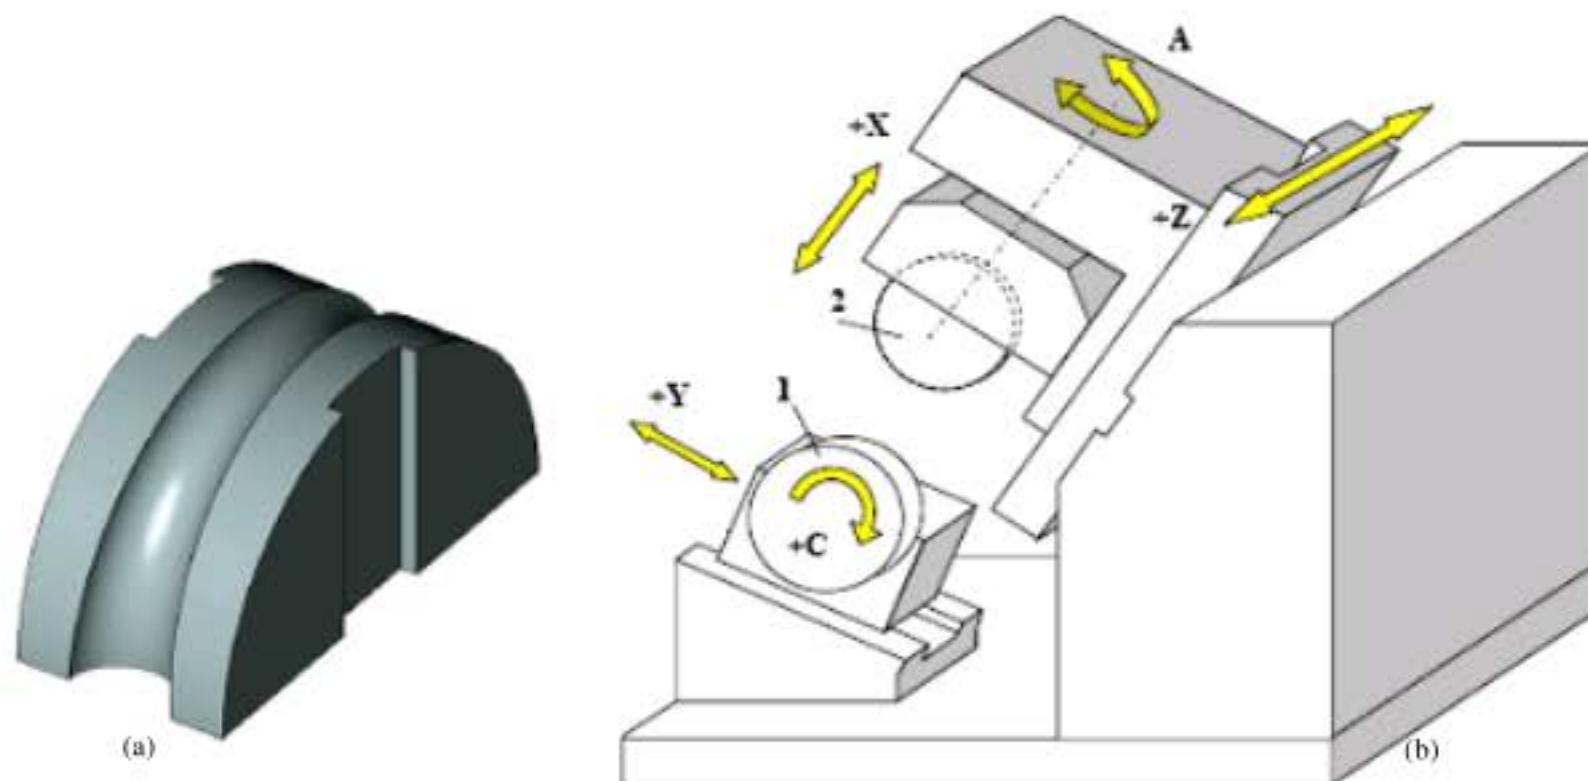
Scheme of form grinding of (a) gauge profile XIIT-90 on (b) GG 52 five-axis CNC machine tool
